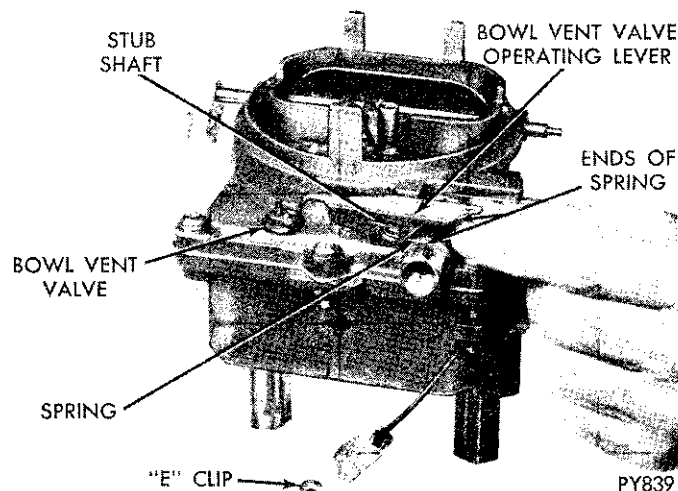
Removing or Installing Bowl Vent Valve Operating Lever
